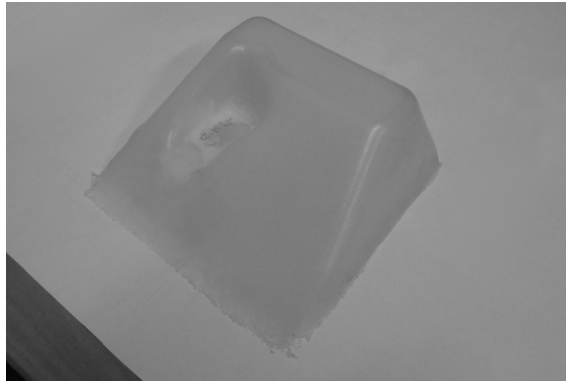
Rotomoulding LDPE part manufactured with the SPIF mould as demoulded
